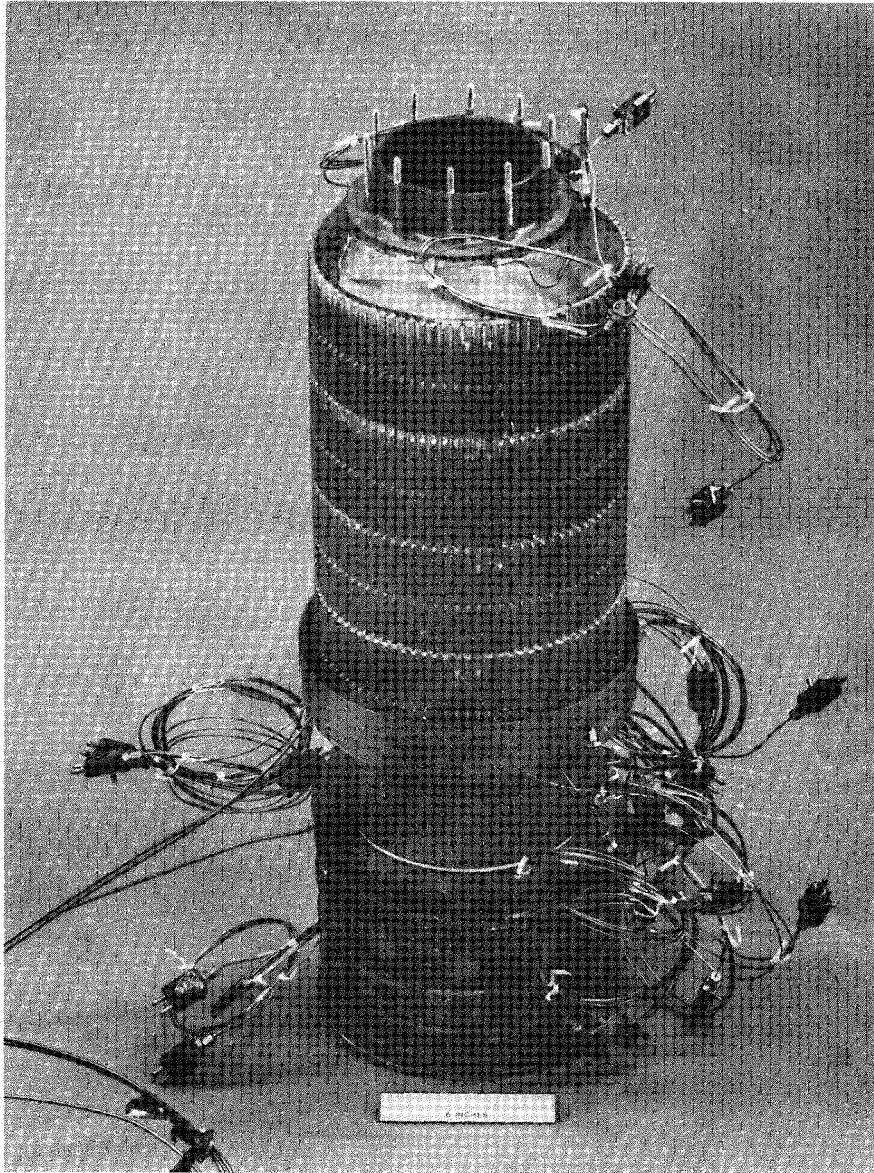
Full-Scale Combustor During Assembly (FRT Version)
